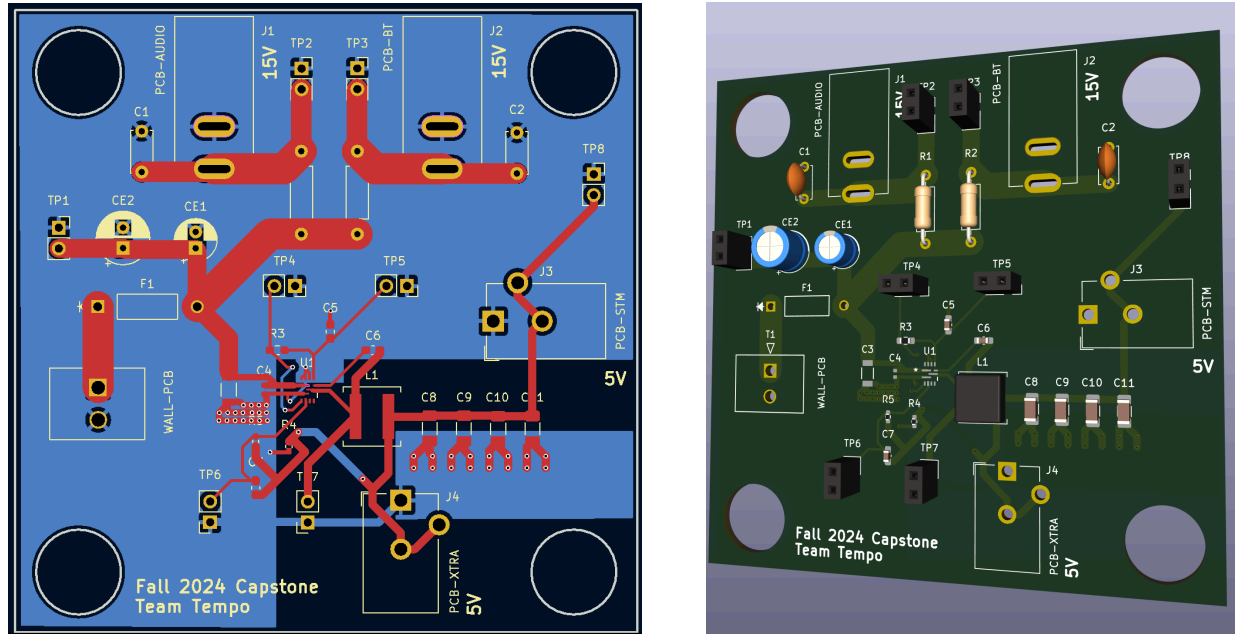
PCB revision 1 – KiCad board layout and 3D model
